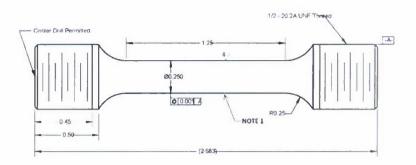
Tensile specimen drawing used for evaluating CP Ti extruded bars.
